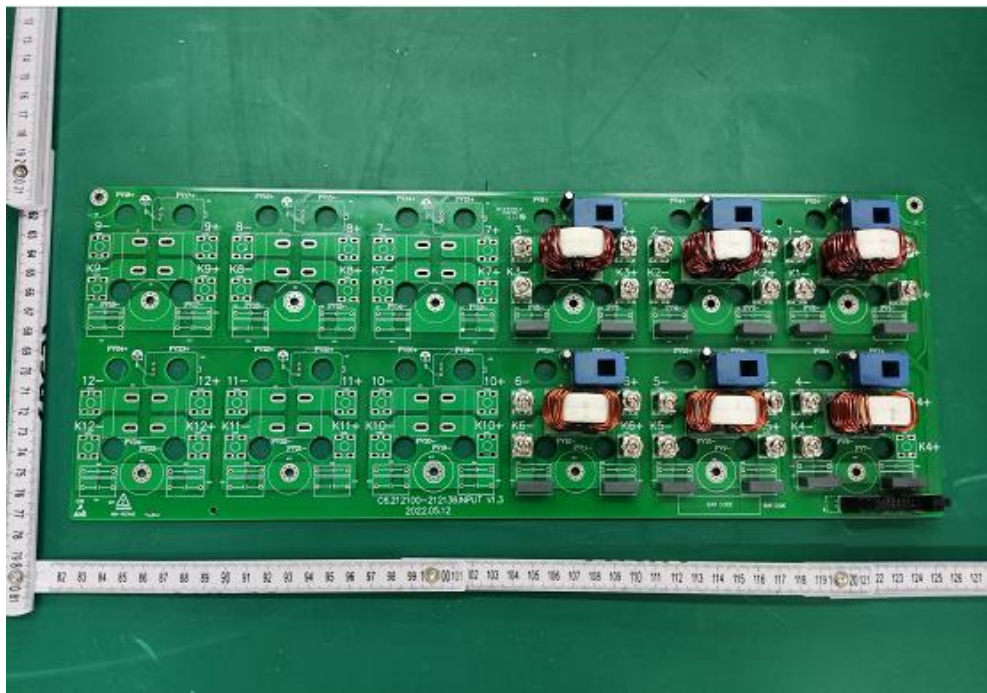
Front view of PV input board for C6-50K-T6-LV-40
